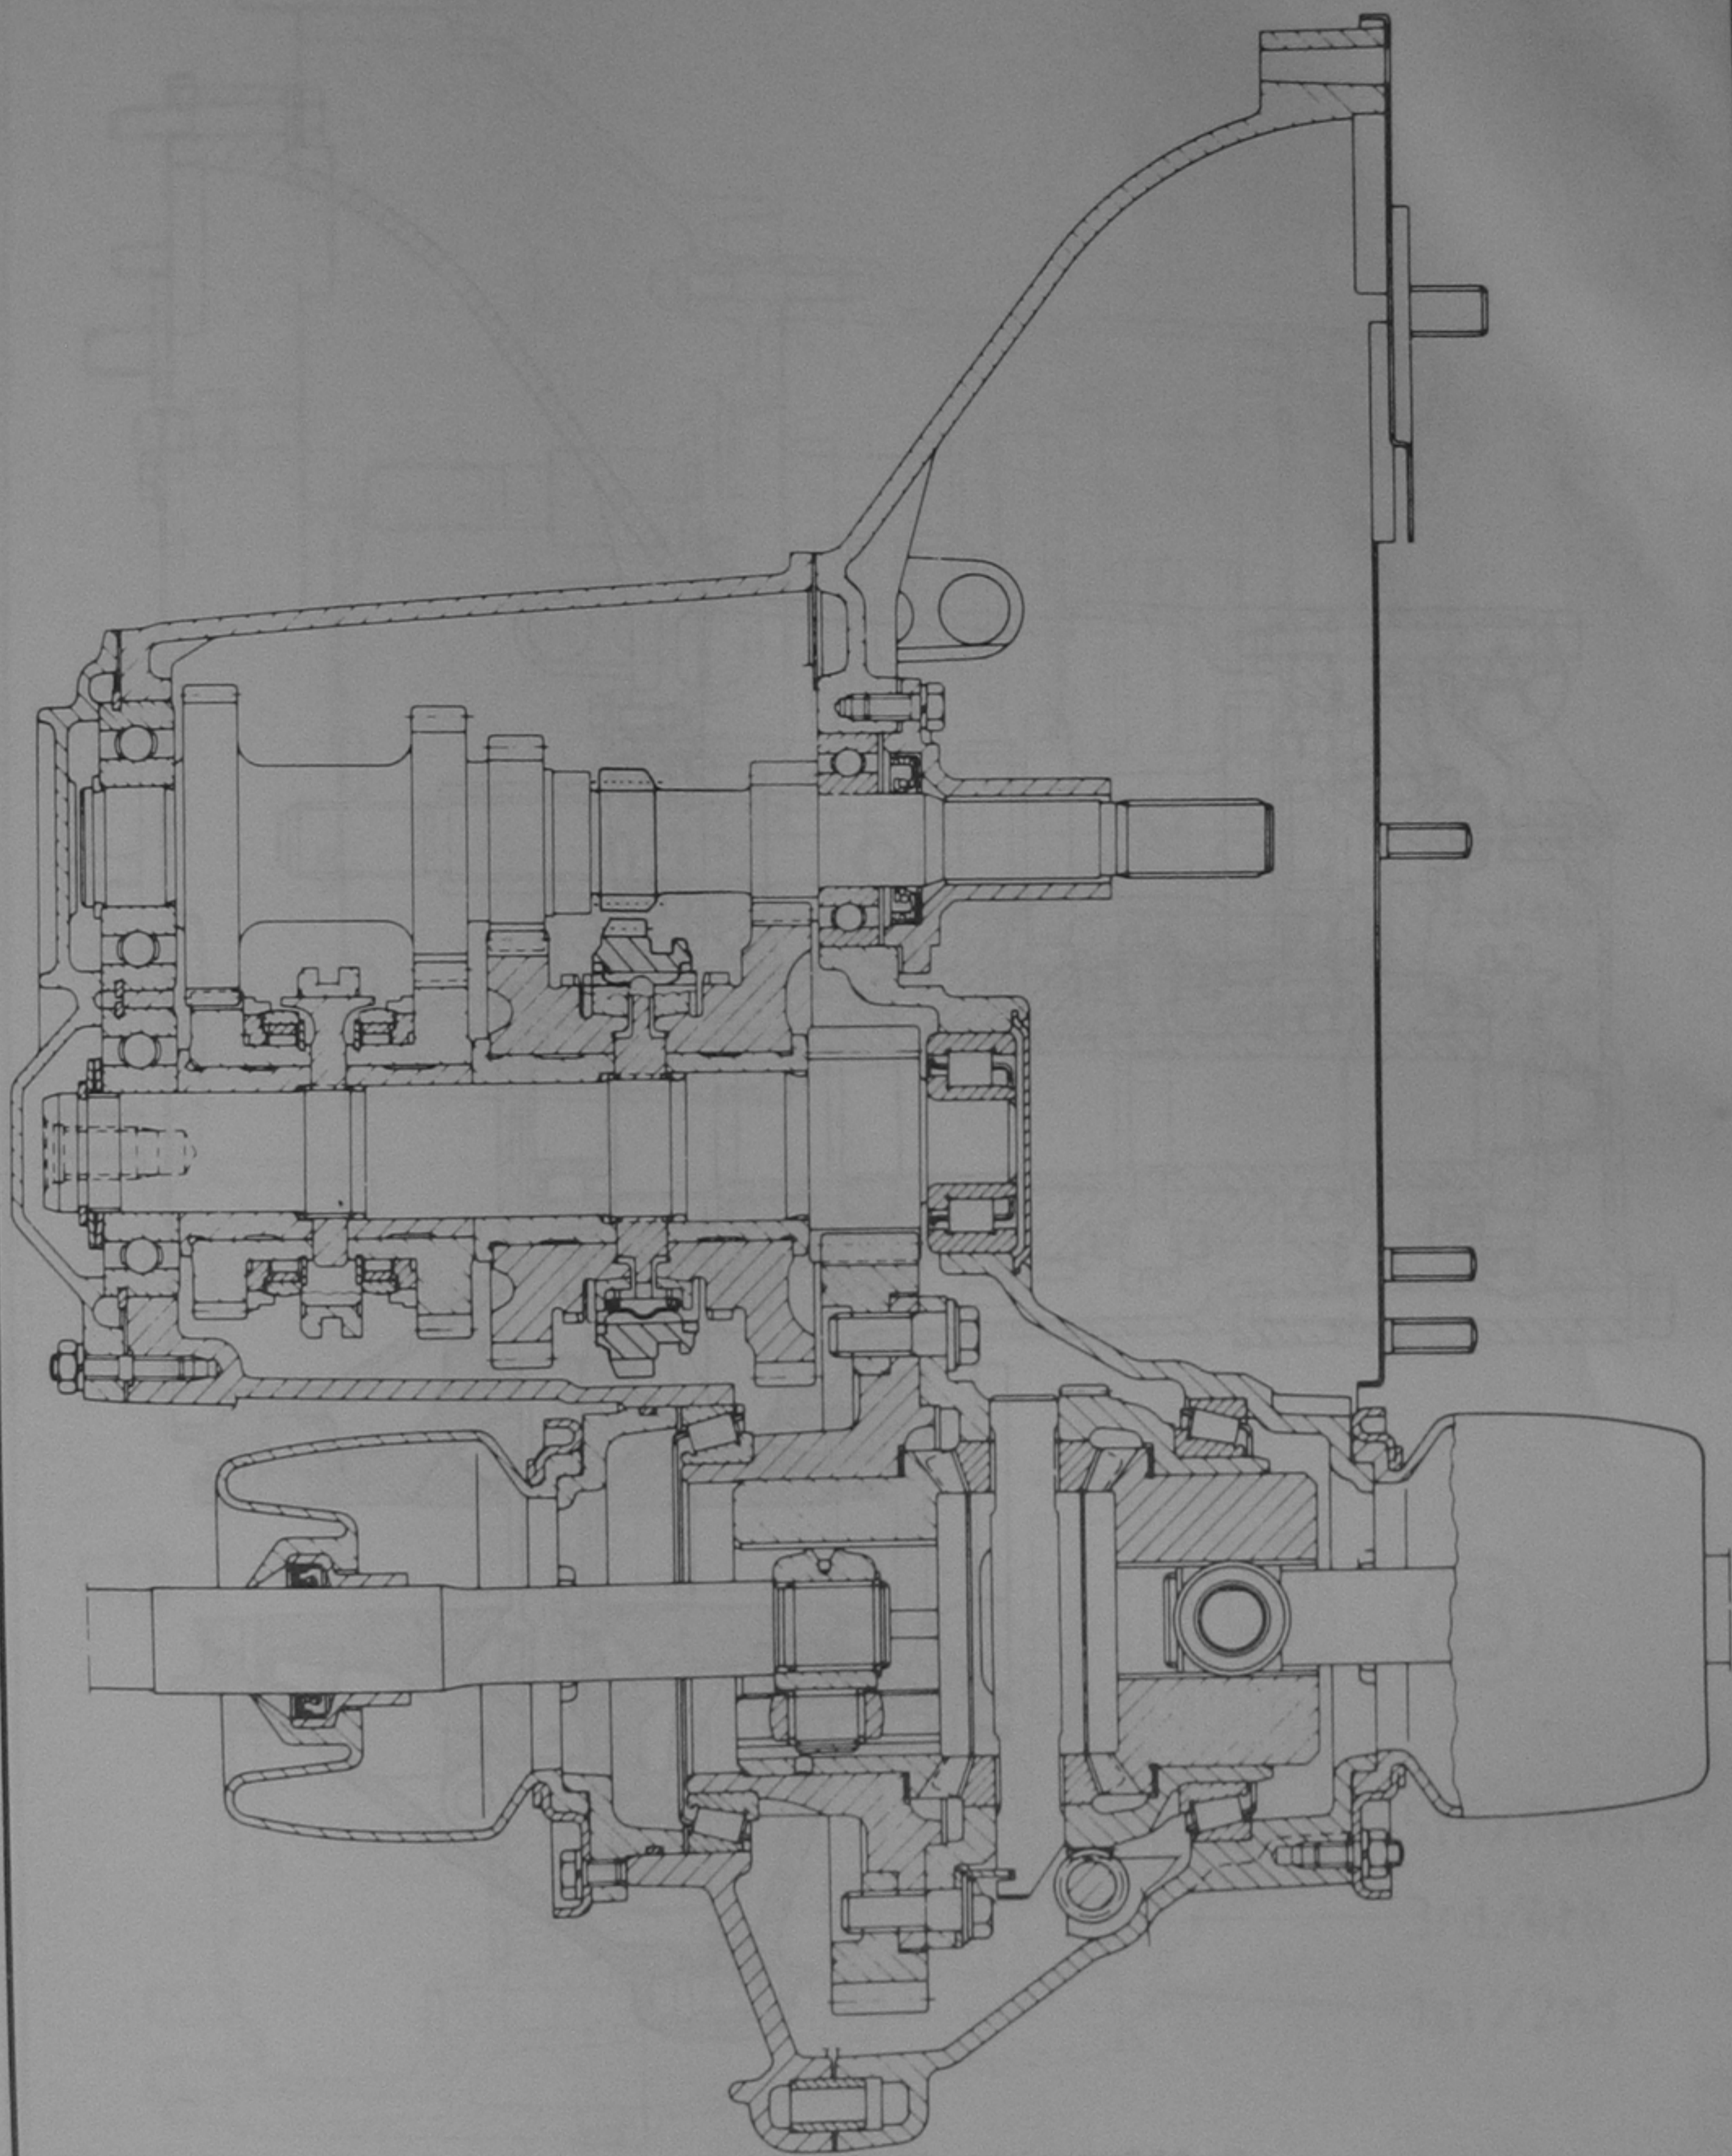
Sectional view of four-speed transmission (Sec 5)
